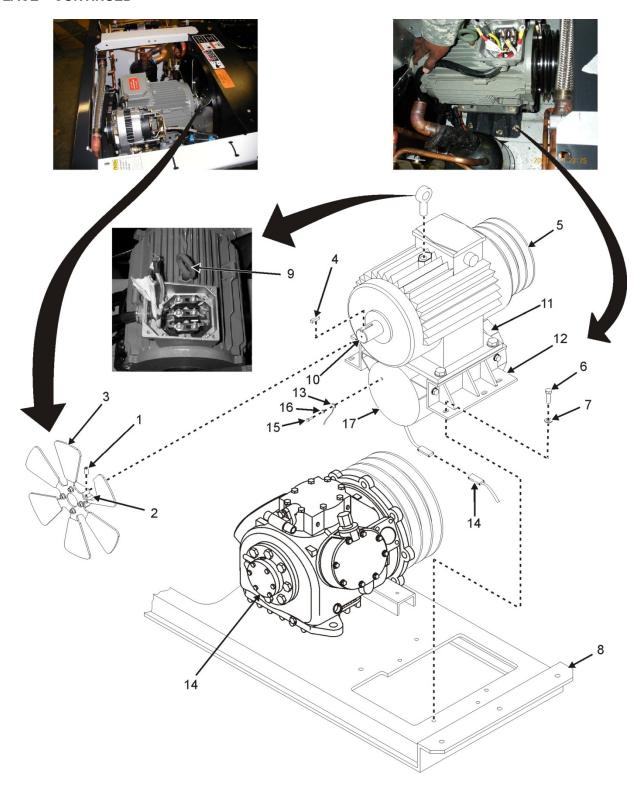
Standby Motor/Single-Phase Alternator Attaching Hardware Removal.
